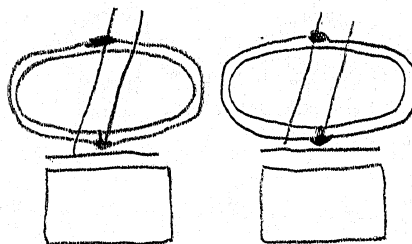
Schematic diagrams of different pictures on the photograph with the X-raying of butt welds with a welding (a) and a weld which does not extend the full thickness of the wall (b)
